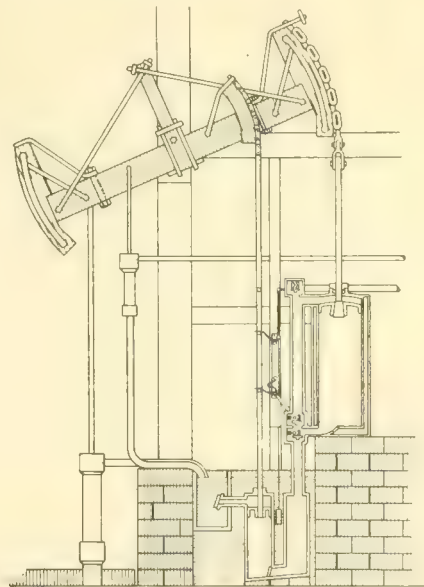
WATT PUMPING ENGINE, 1769 A. D.
